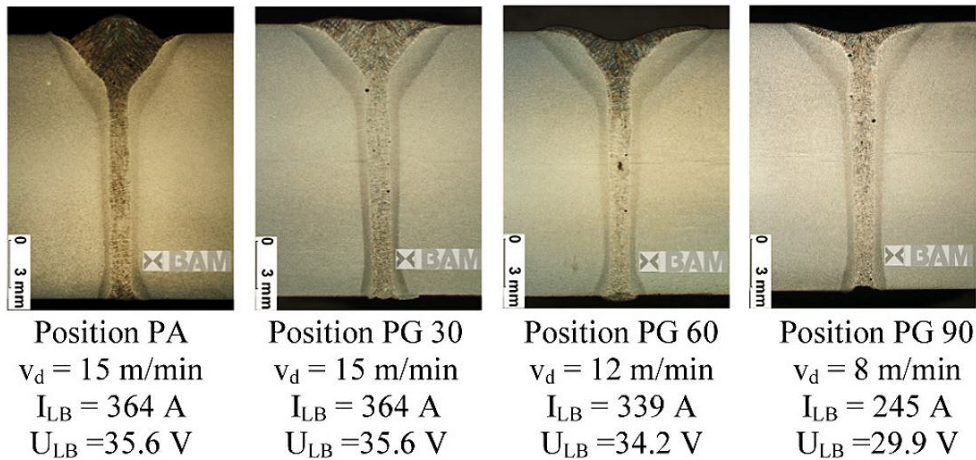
Weld cross-section examples of 16 mm thick butt-joint welds from positional laser-arc hybrid welding experiments from Rethmeier et al. (2009). Laser power 17 kW; welding speed 2 m/min.
